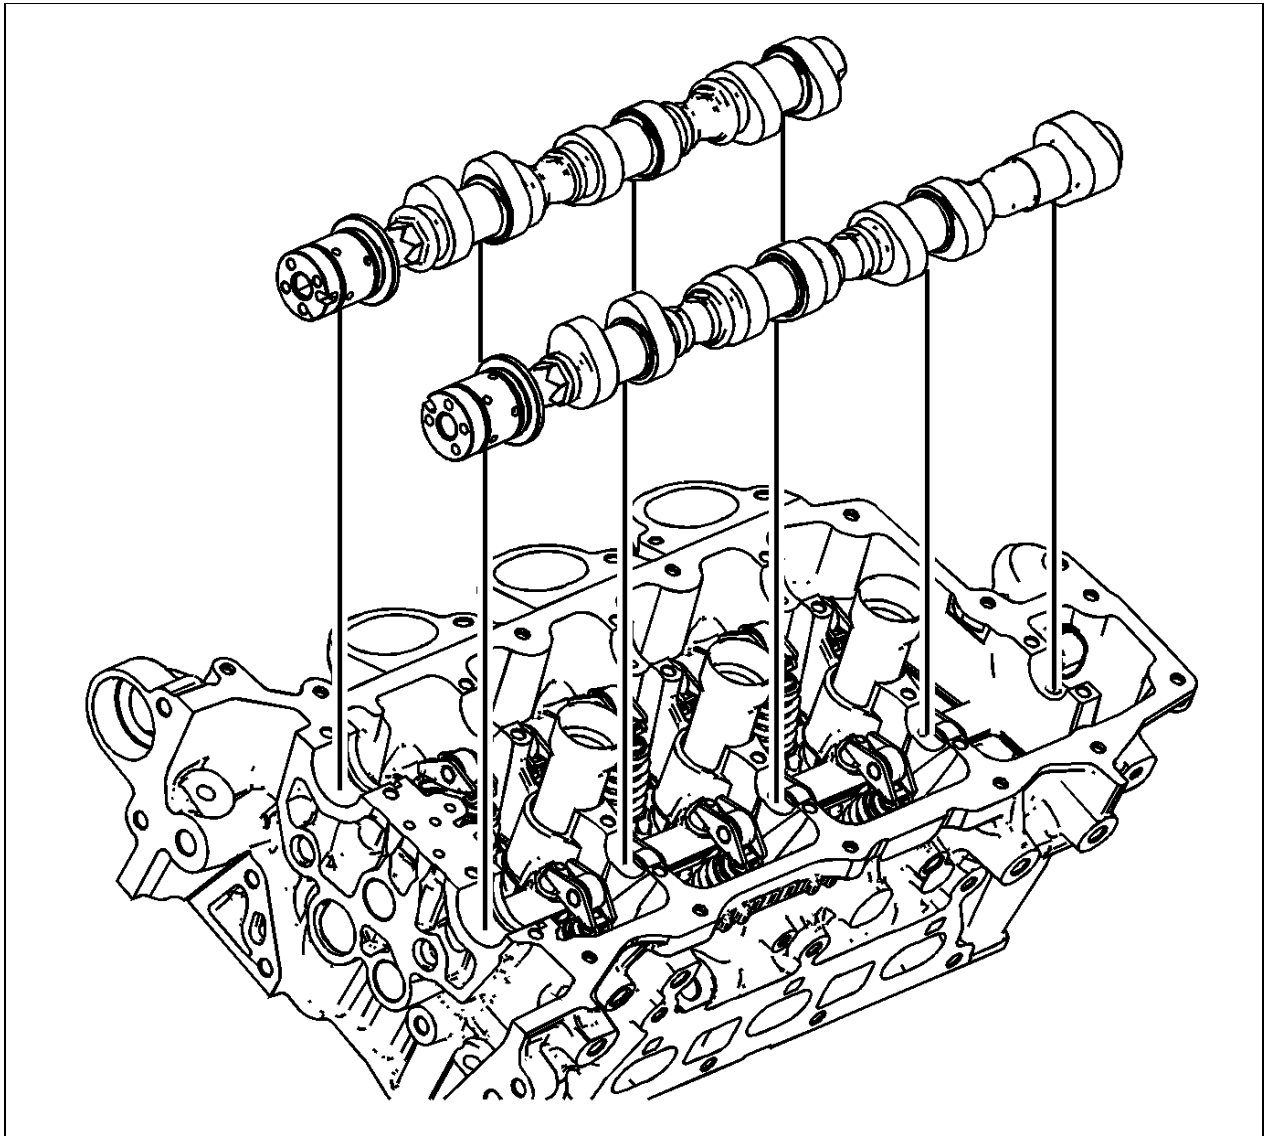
Removing/Installing Camshaft Bearing Thrust Caps
